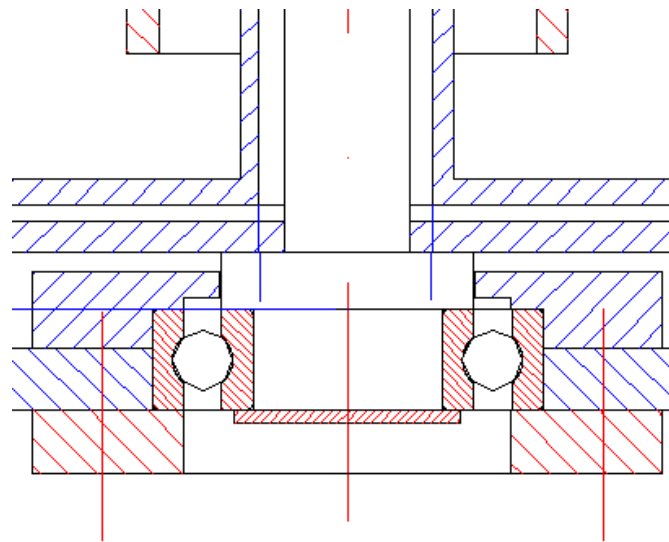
Design of the cold bearing. The torque is supplied to the support structure using three 3mm bolts separated by 120° from each other).
